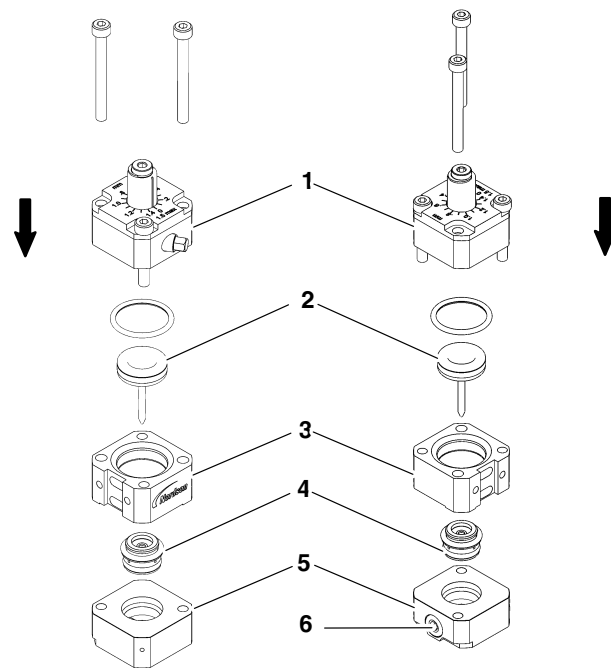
Module reassembly (left-side image: front iso view; right-side image: back iso view)
